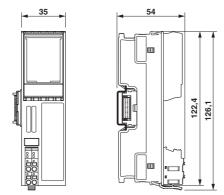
Nominal dimensions of the H housing with one terminal field and short connectors (type 1H (UNI), e.g., AXL F PWR 1H, AXC F XT IB 1H)
